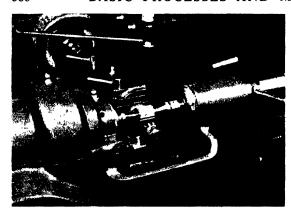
THE CUTTER AND WORK ON A SMALL GEAR-HOBBING MACHINE
